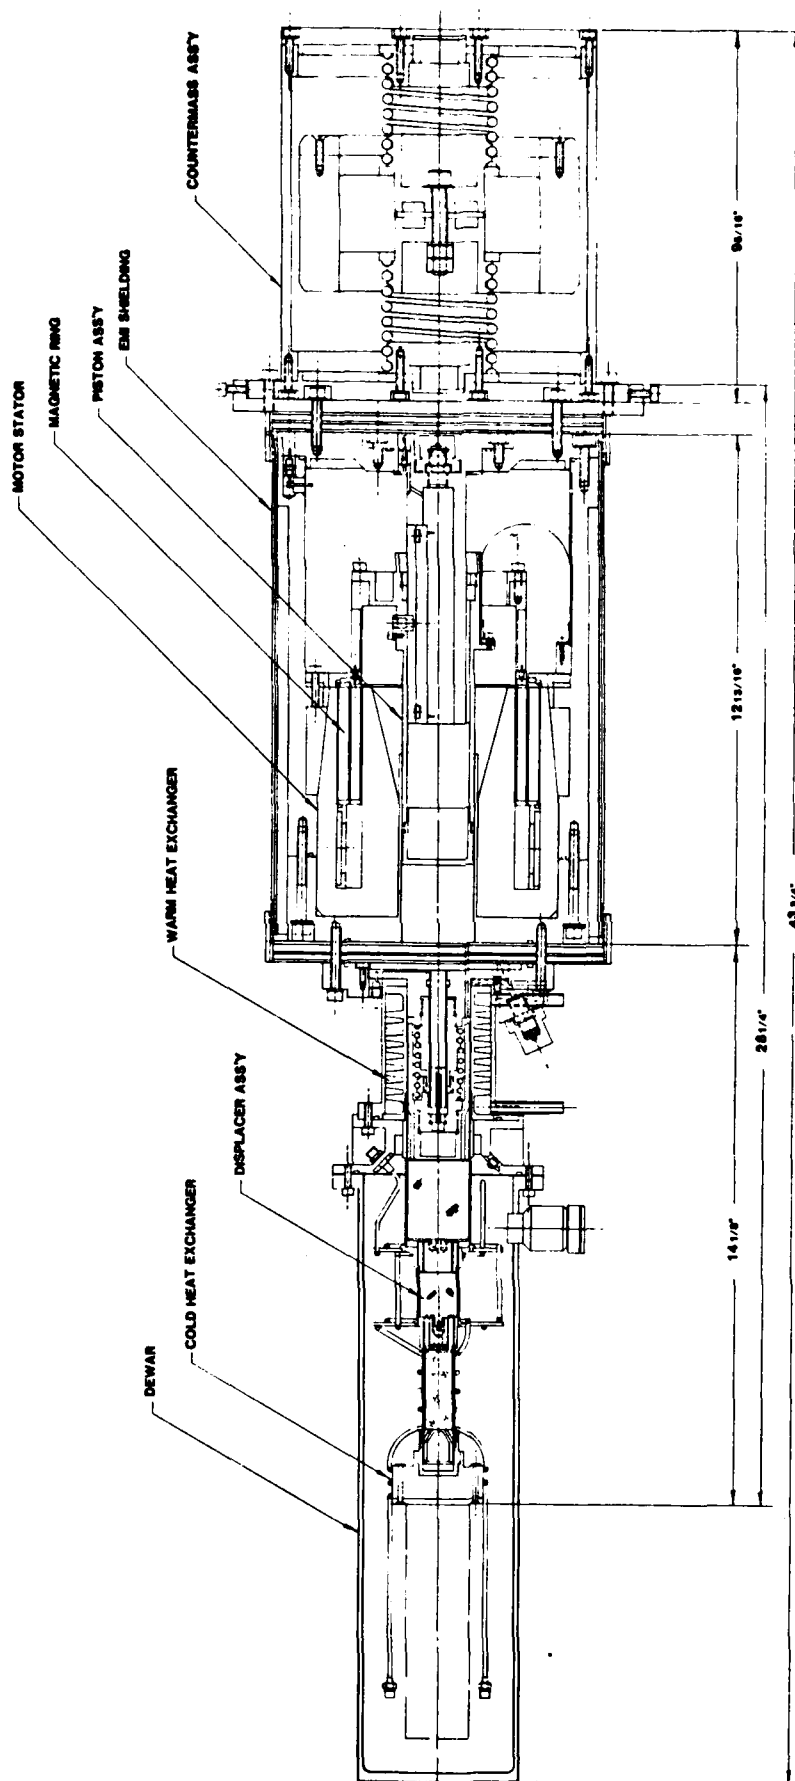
Layout drawing of 10°K Stirling cycle cooler.
